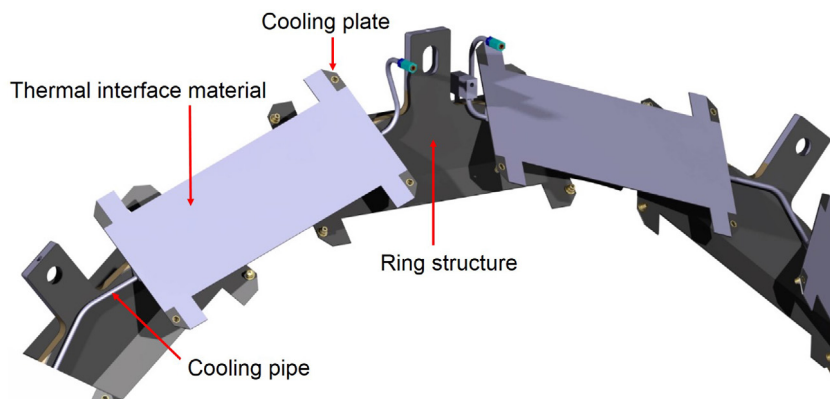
CAD drawing of the tilted ring geometry including cooling pipe routing and cooling plates [5].
